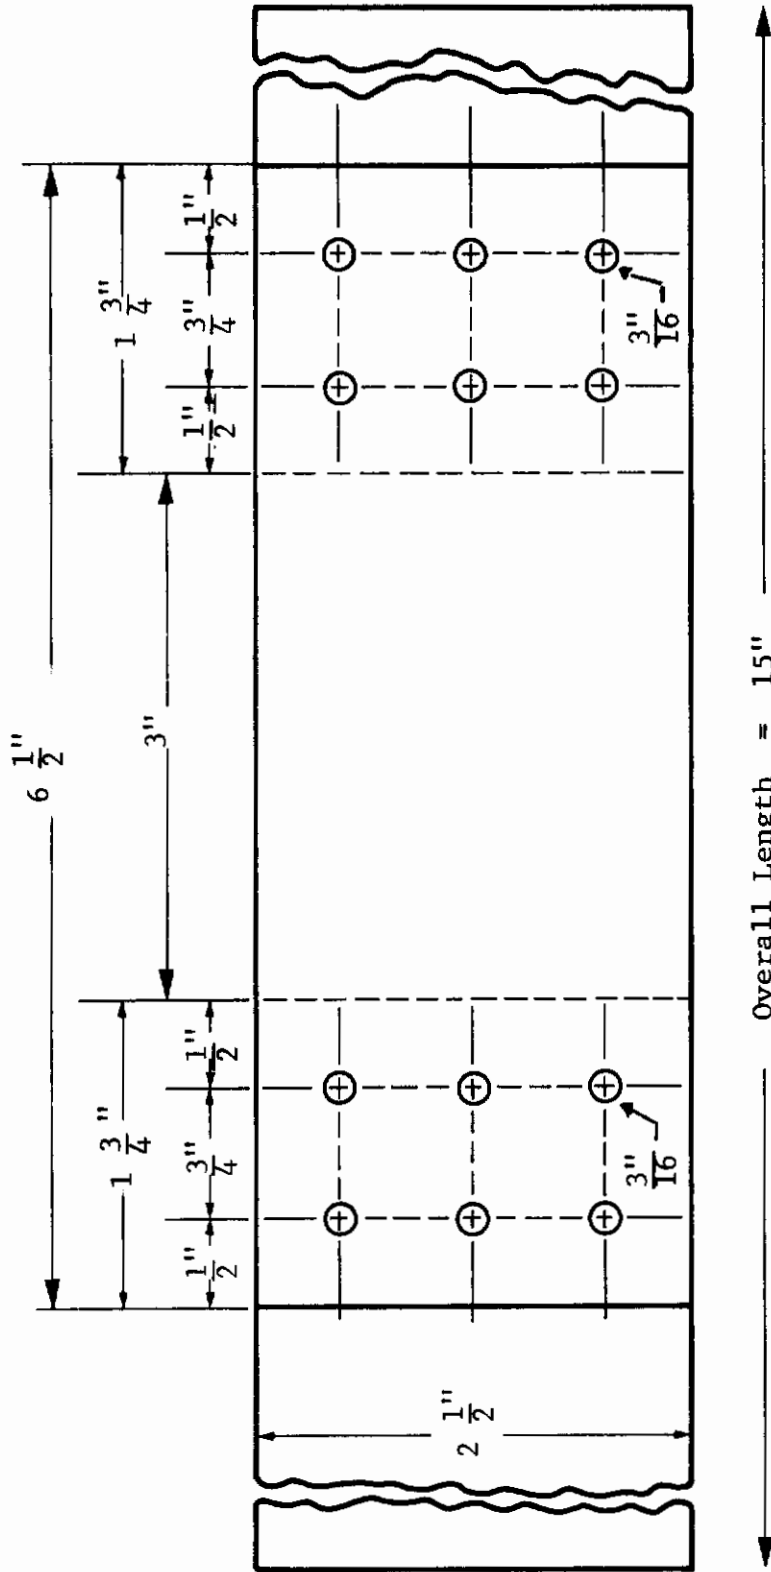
DIMENSIONS OF DOUBLE-ROW TRIPLE-LINE BOLTED JOINT SPECIMEN
